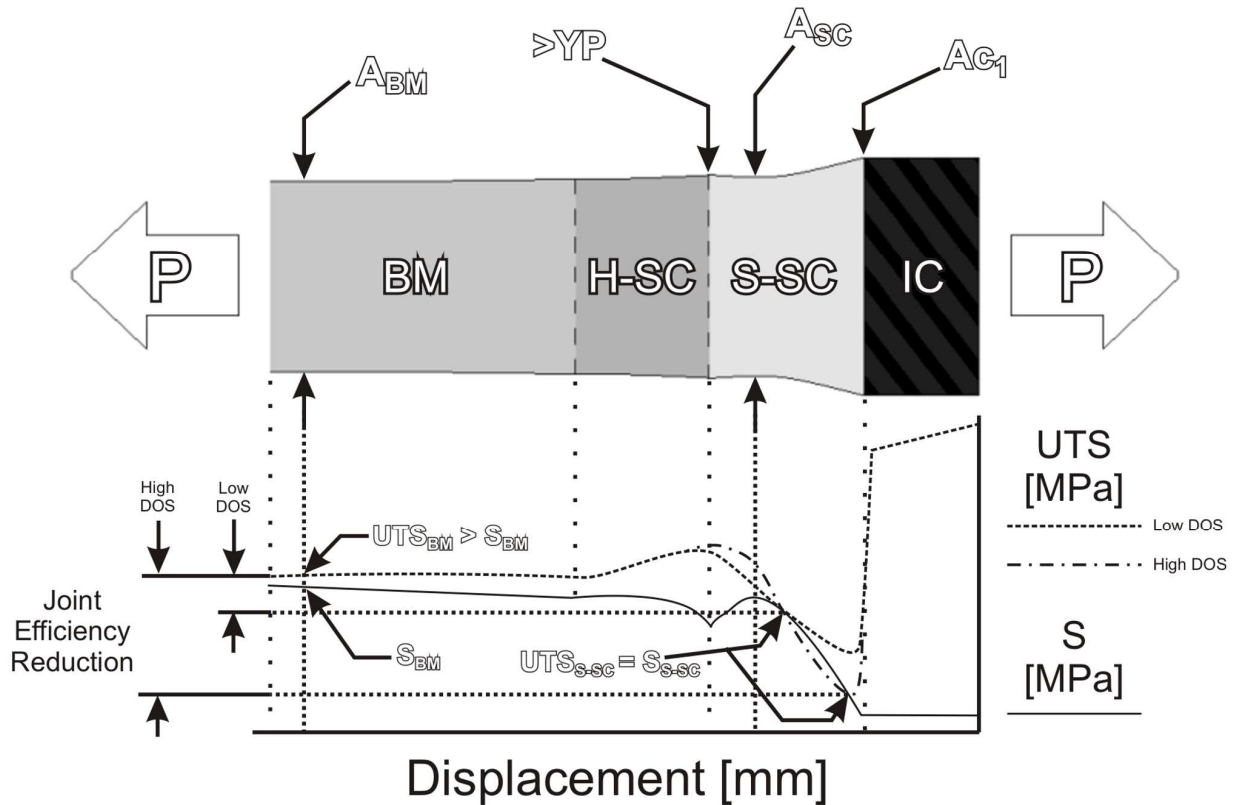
A general schematic depicting how HAZ fracture can cause the joint efficiency in welded DP sheet steel to decrease.
